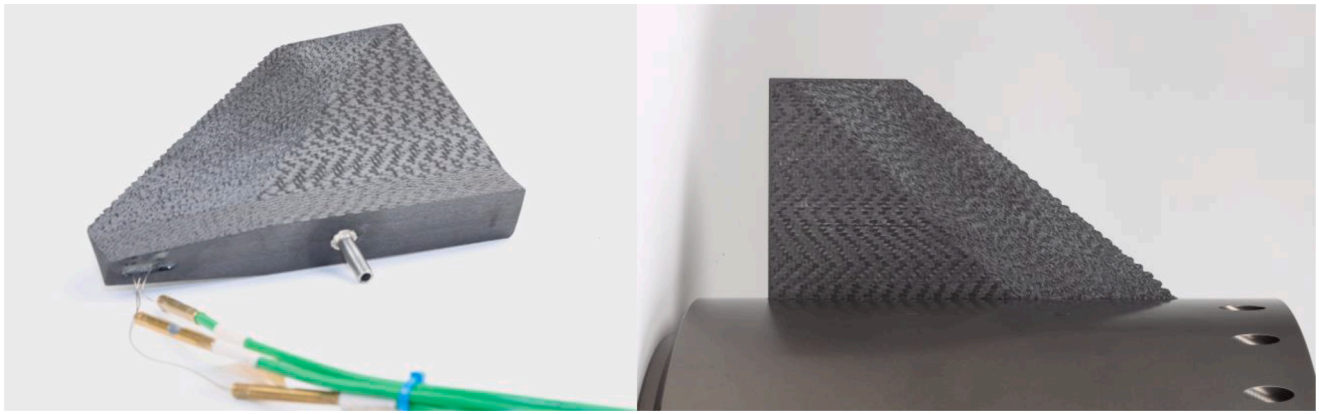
Pictures of the CMC fin: a) fin with soldered tube for coolant feeding and glued thermocouples; b) fin integrated in the FinEx module.
